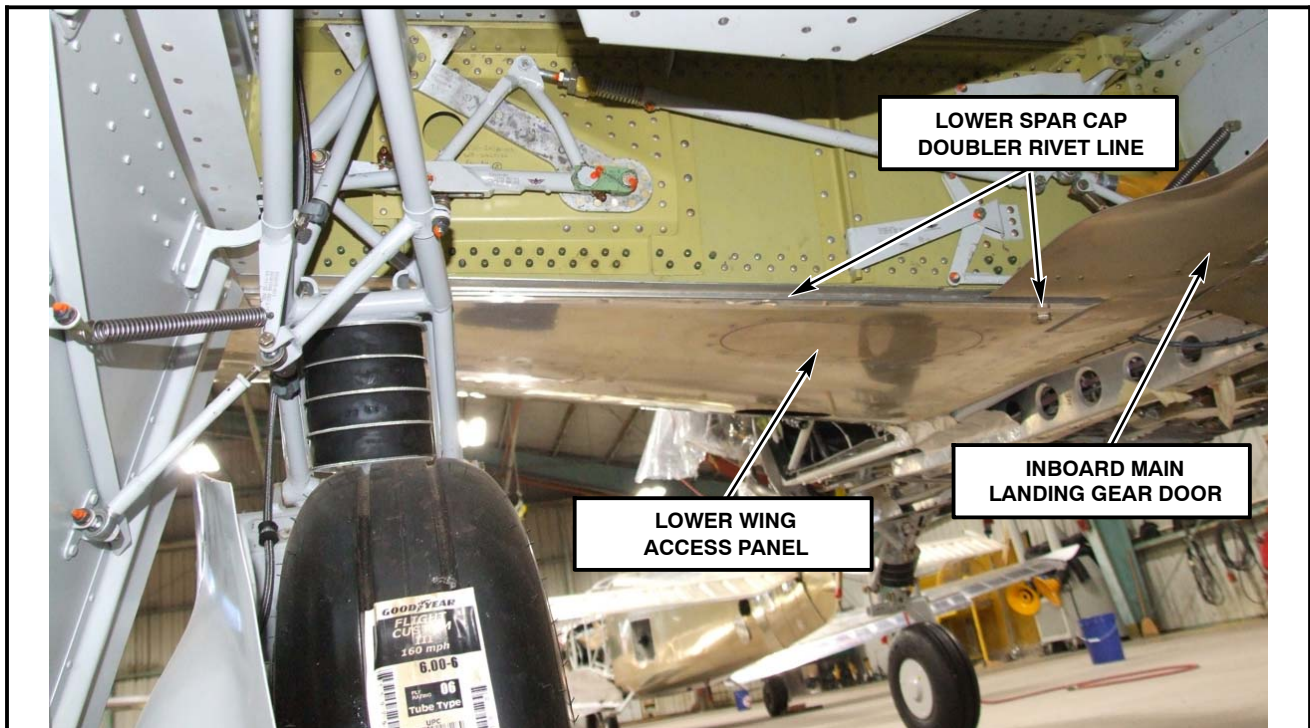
LOWER SPAR CAP RIVET LINE - BOTTOM OF WING
